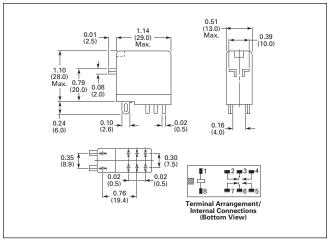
D4PR2 — Approximate Dimensions in Inches (mm)
